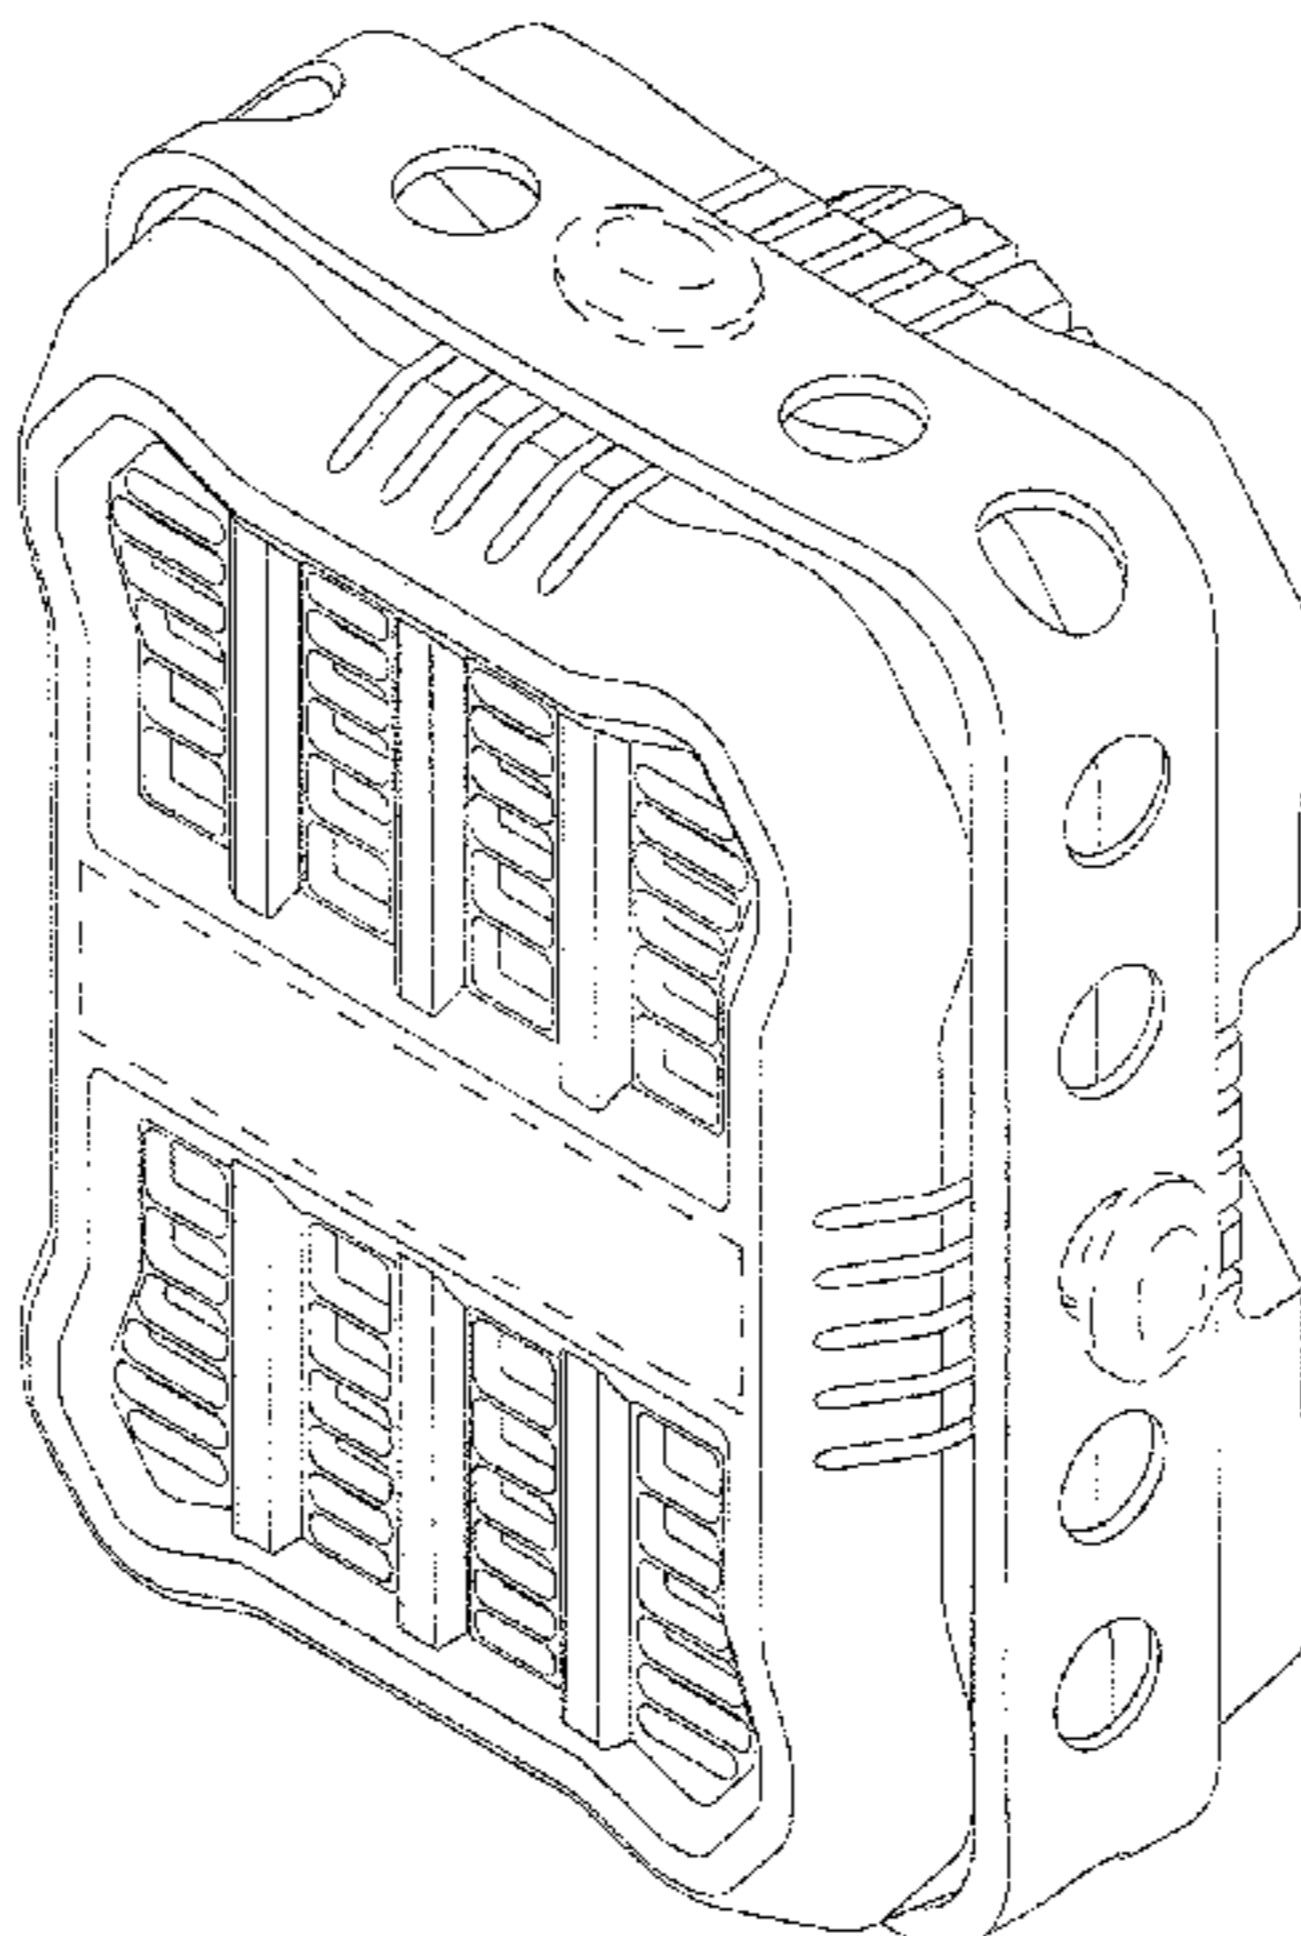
is a bottom plan view of the embodiment shown in FIG. 1; and, FIG. 7 is a top, right perspective view of the embodiment shown in FIG. 1. The broken lines shown represent unclaimed subject matter and form no part of the claimed design.
